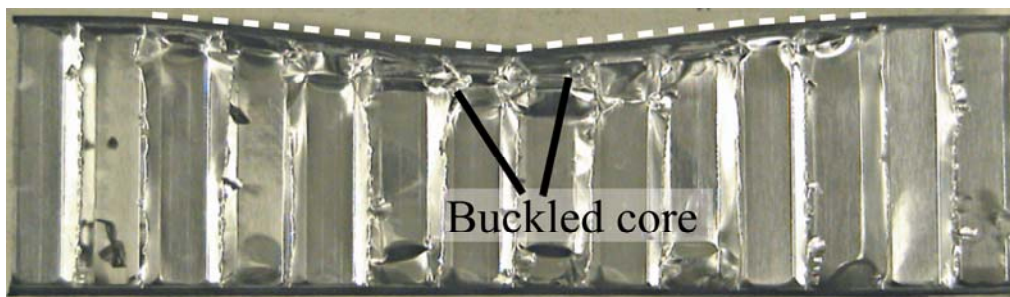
Cross-sectional view of damaged aluminum-honeycomb sandwich panel.
